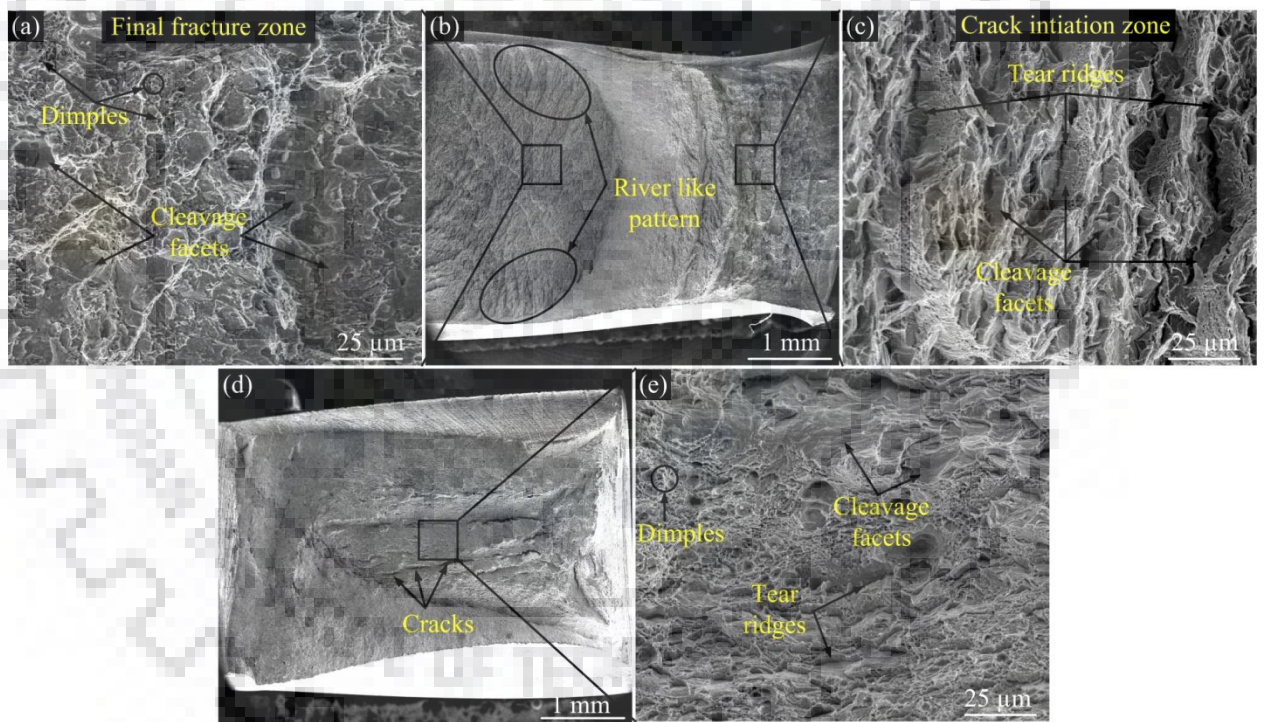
Fracture surface appearance across the welded specimen in as-welded condition (a), (b) & (c) using P92 filler and (d) & (e) using E911 filler
